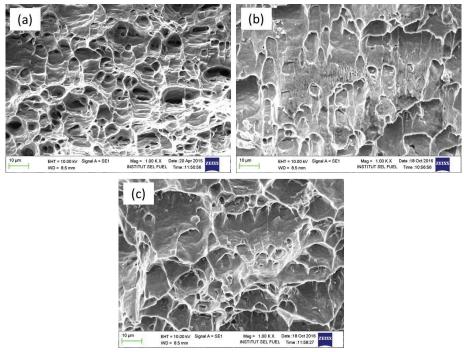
Fracture morphology of (a) FSWed, (b) CR10% and (c) CR40%
